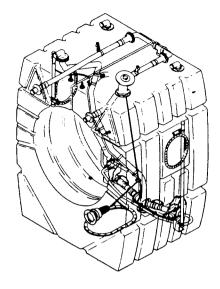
Removal; Aft Fuselage Tank (Sheet 10)
